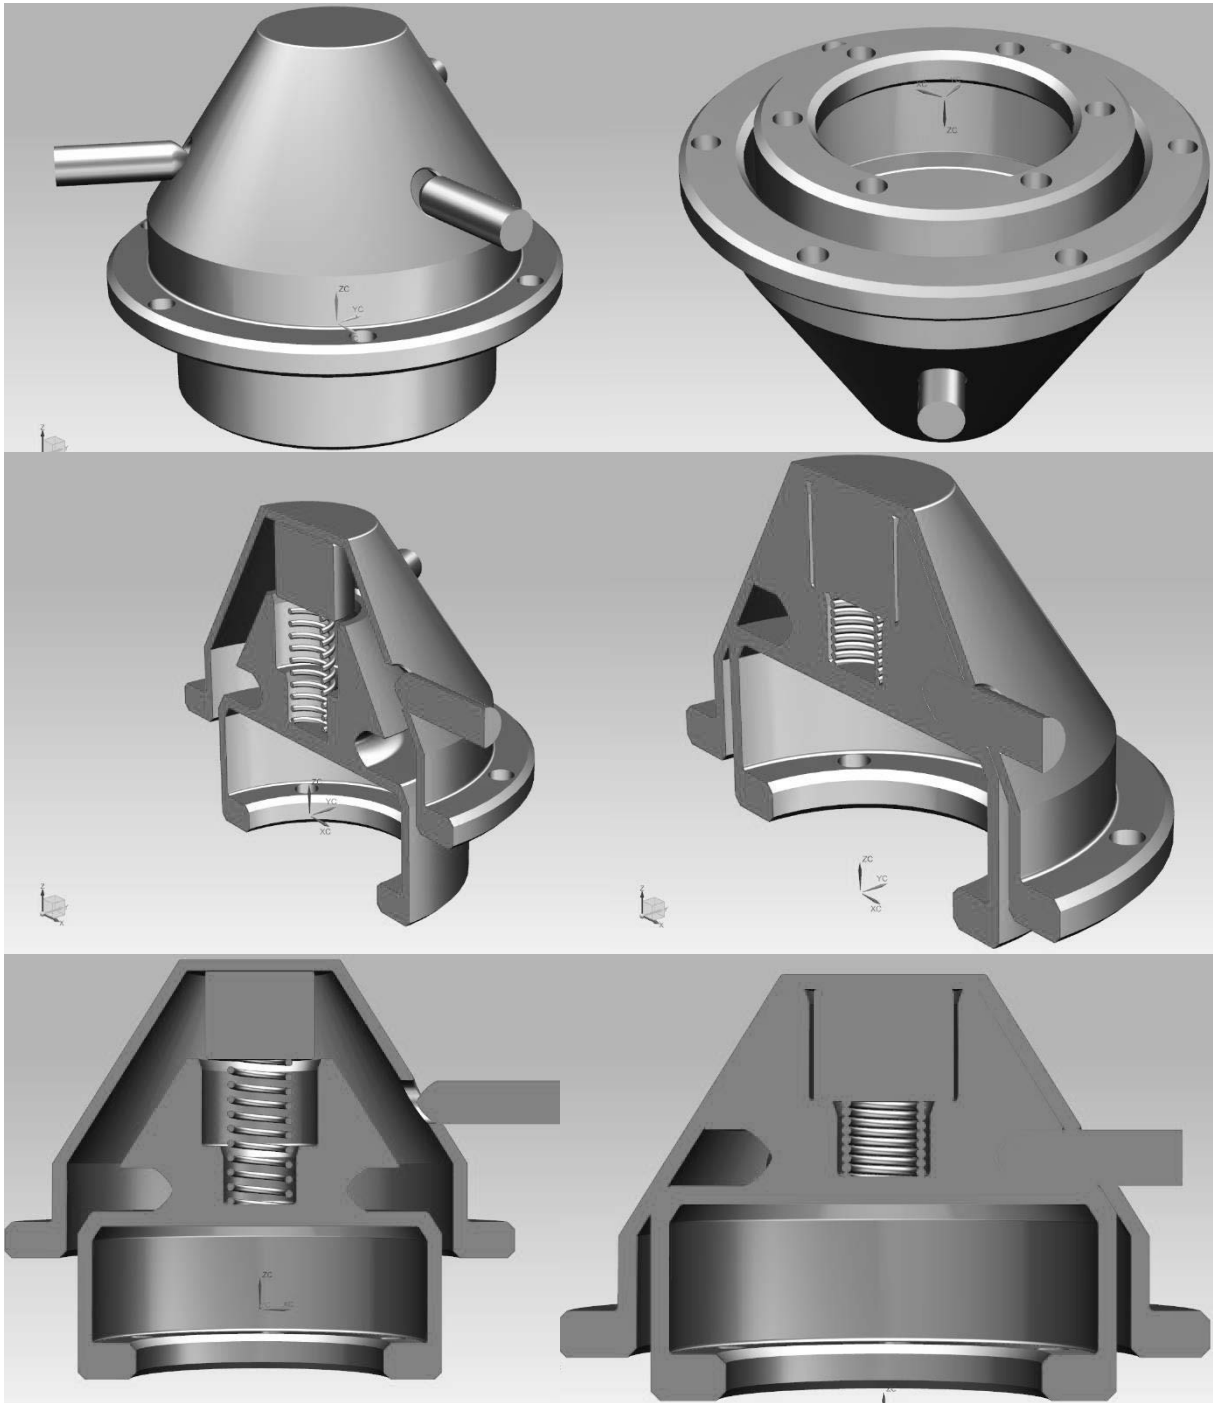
Detailed model and its cross-sections, left side – docking, right side – mated.
